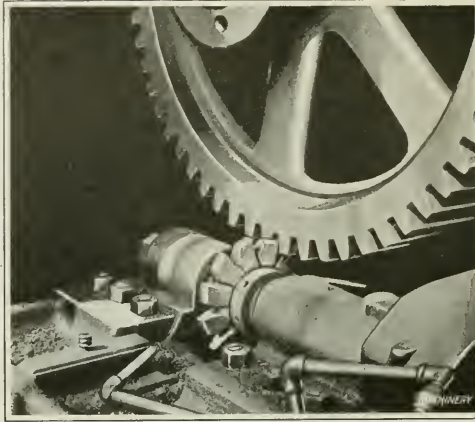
Cutting a Spur Gear with a Formed Cutter
